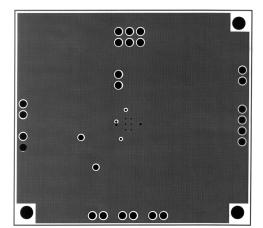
Recommended NHW PC Board Layout: Bottom Layer
